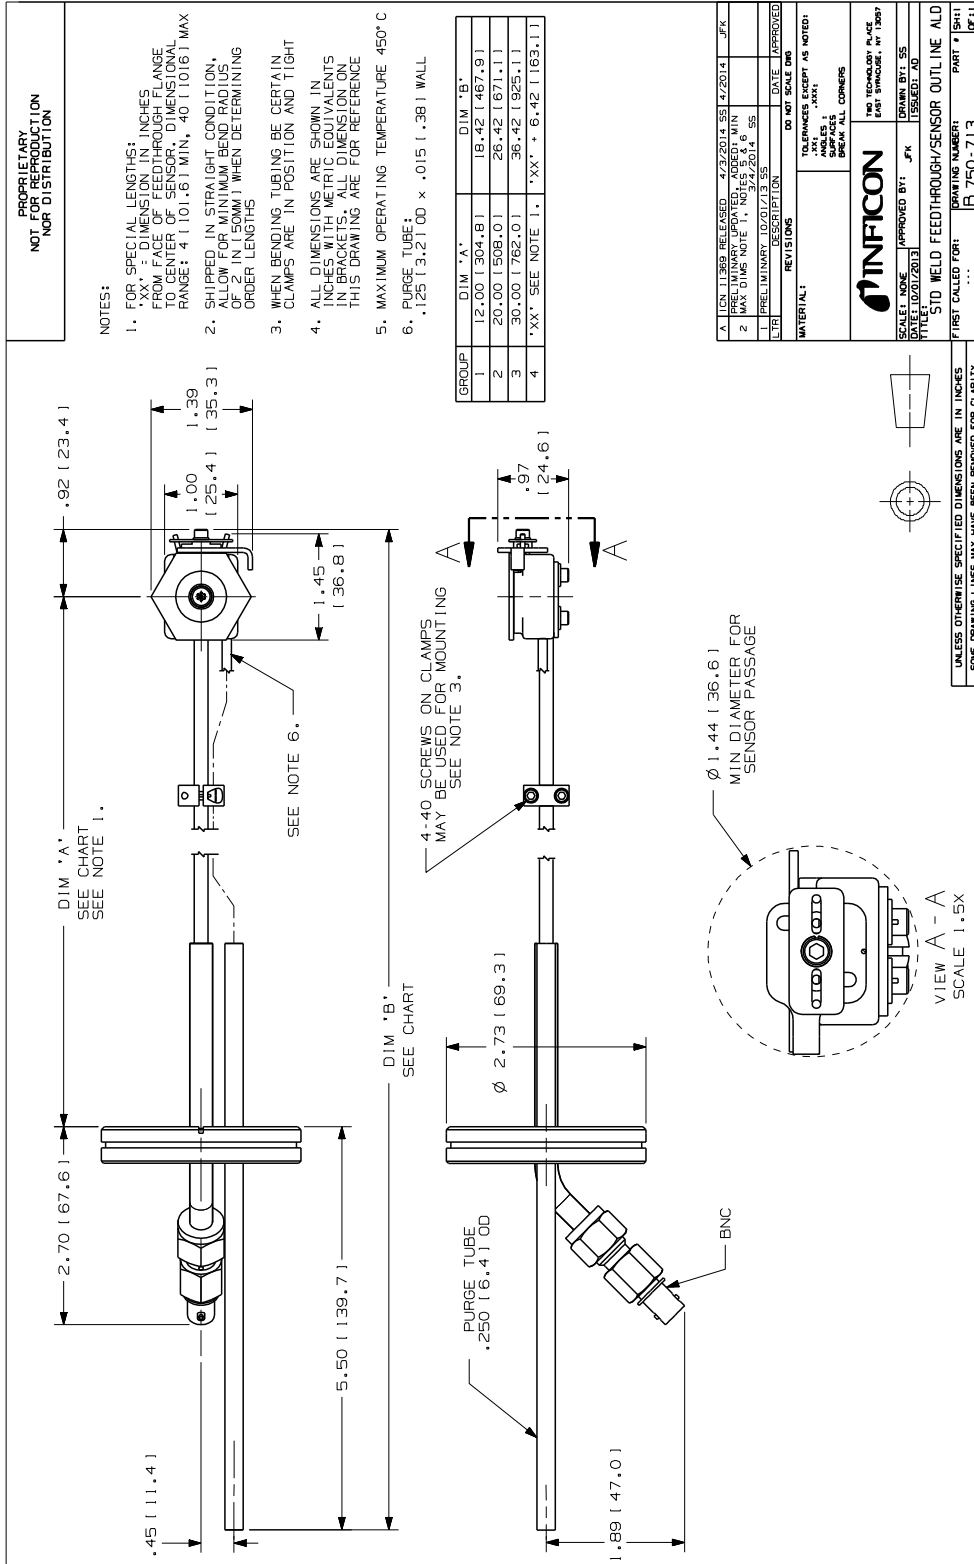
Welded ALD Sensor (PN 750-713-G4) outline
